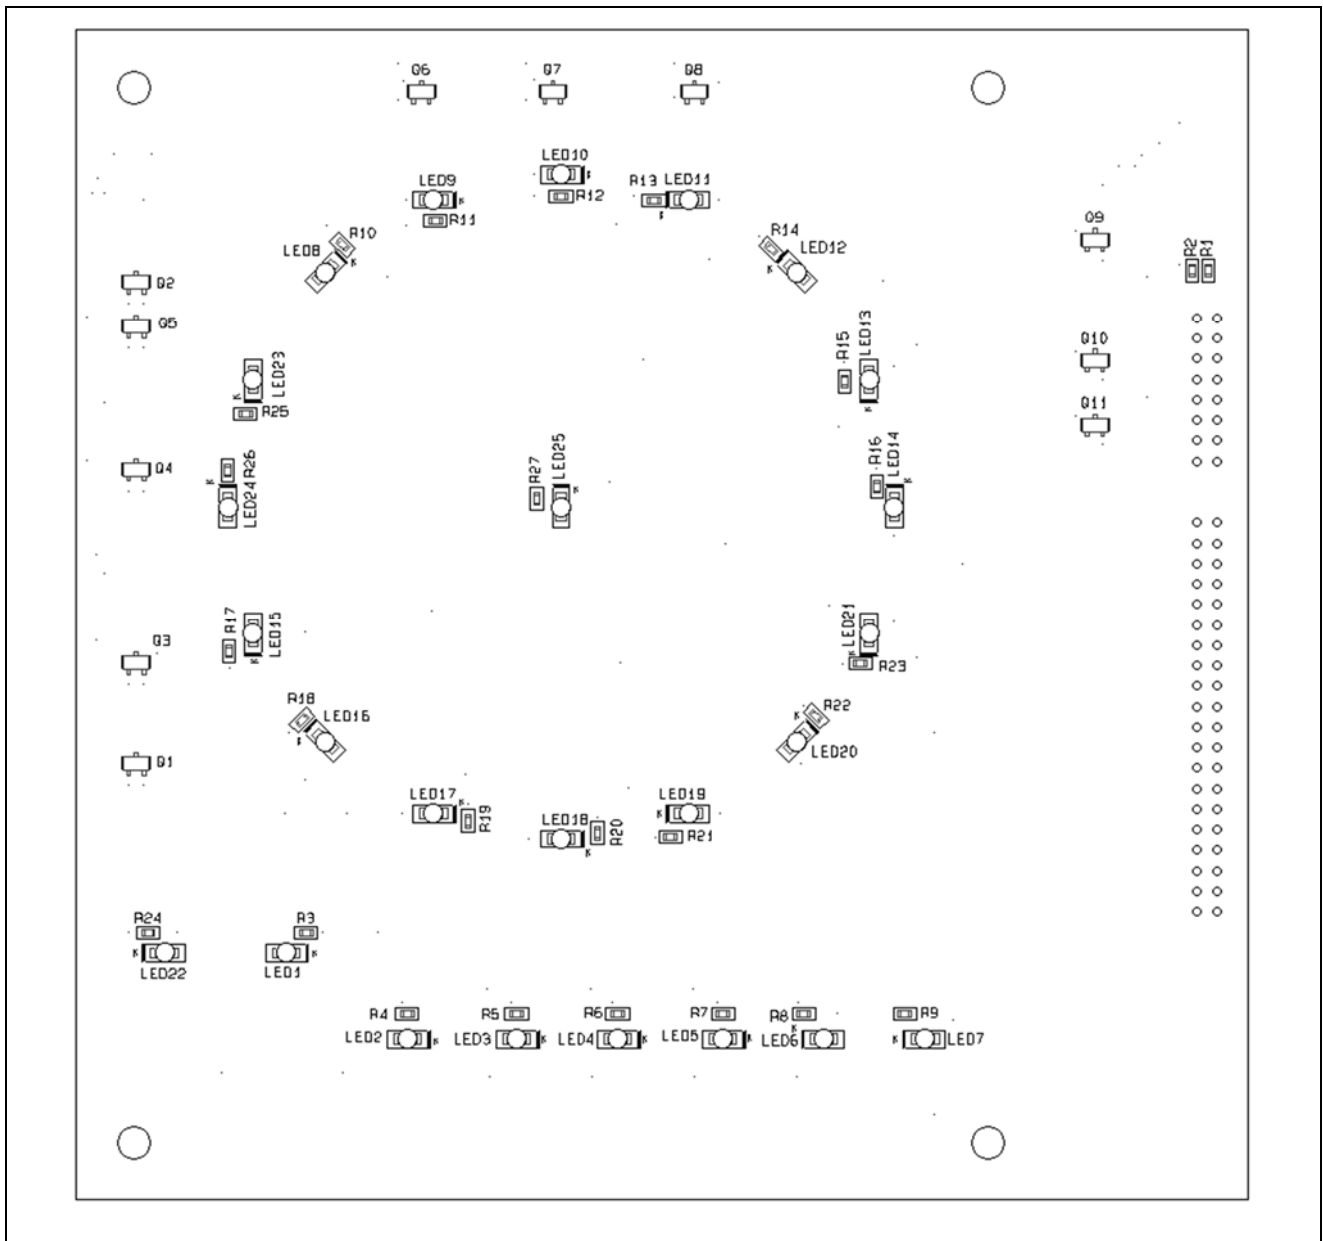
Application Board Component Placement (bottom/soldered side)
